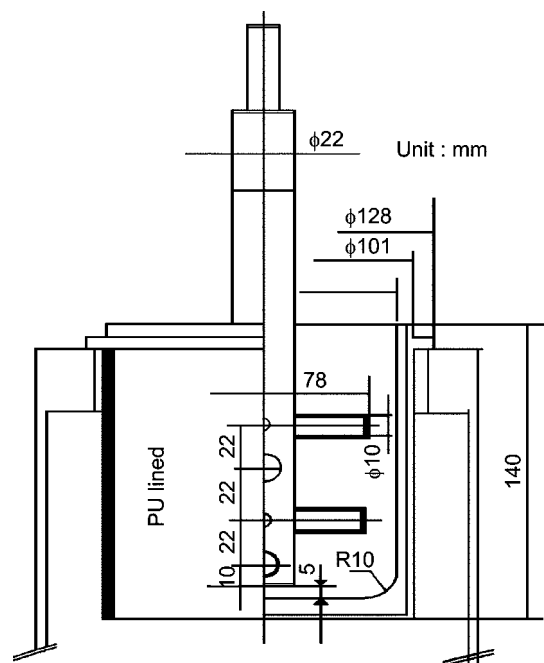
Dimensions and shape of grinding mill pot of experimental stirred media mill.
